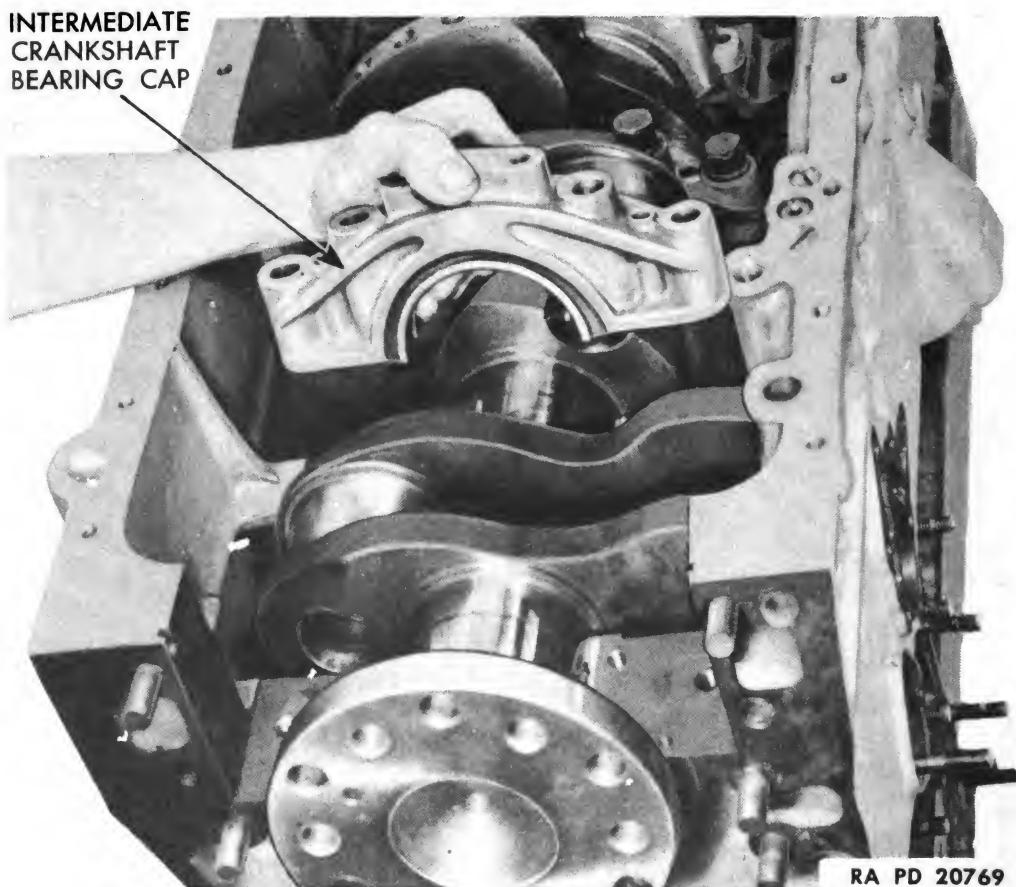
Removing Crankshaft Intermediate Bearing Cap
